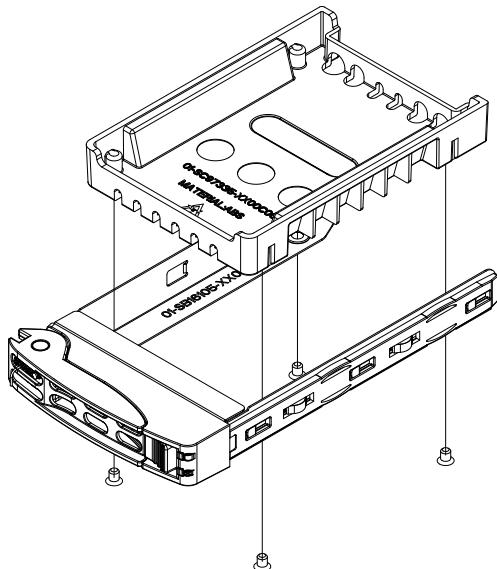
Removing a Dummy Drive from the Drive Carrier
